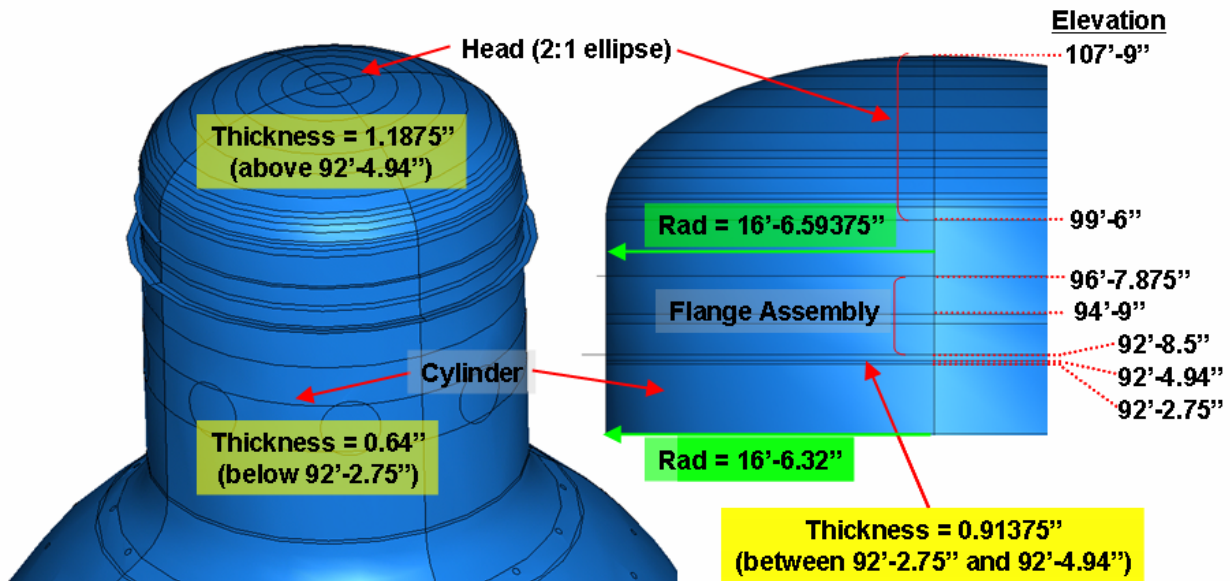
Head and Cylinder Shell Thickness and Dimensions
